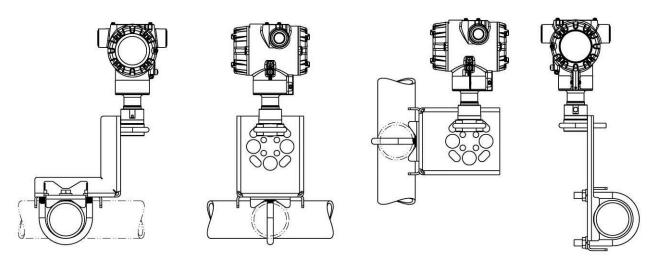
Typical mounting dimensions of STA725 & STA745 for reference
